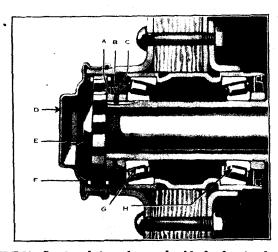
Sectional view of rear wheel hub, showing bearings
